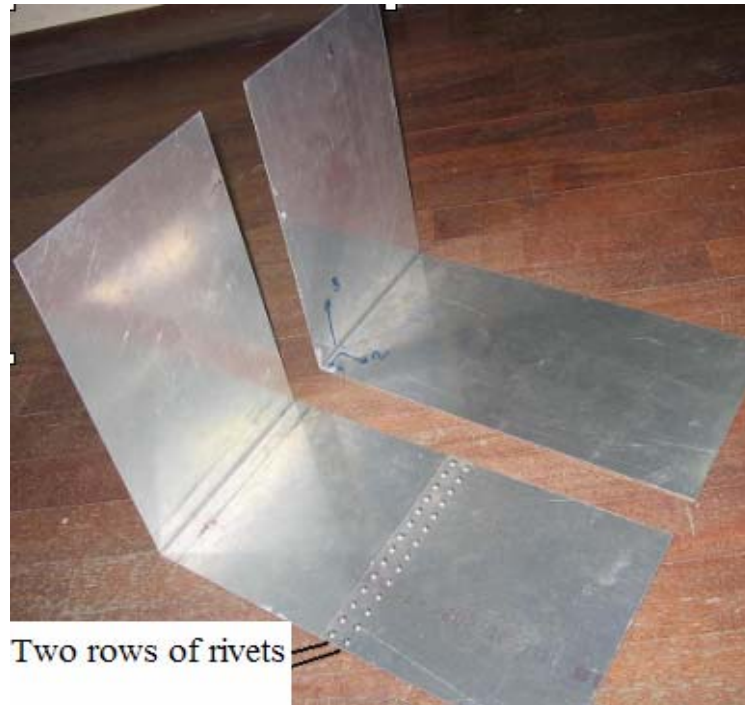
The Riveted Plate and the Plate without Rivets
